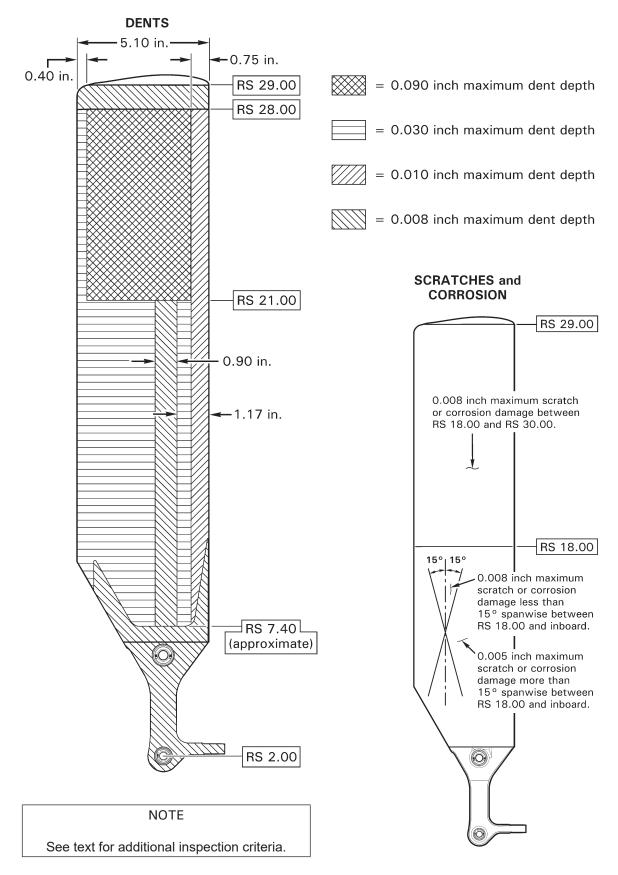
TAIL ROTOR BLADE INSPECTION CRITERIA
